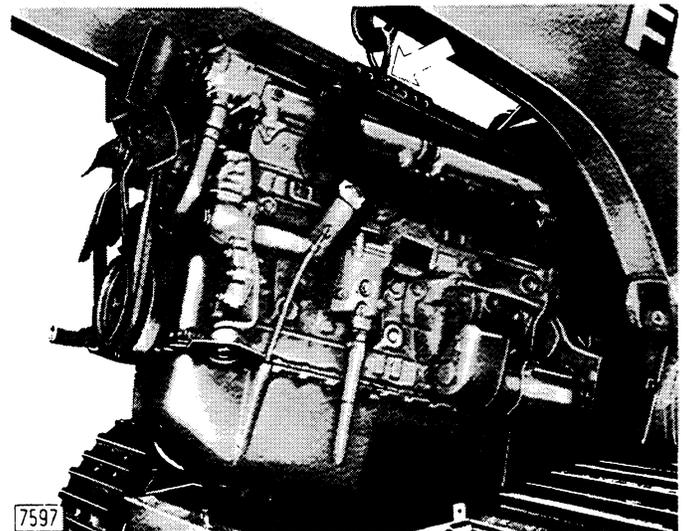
Removing (or Refitting) the Power Unit Using Lifting Hook No. 291493
